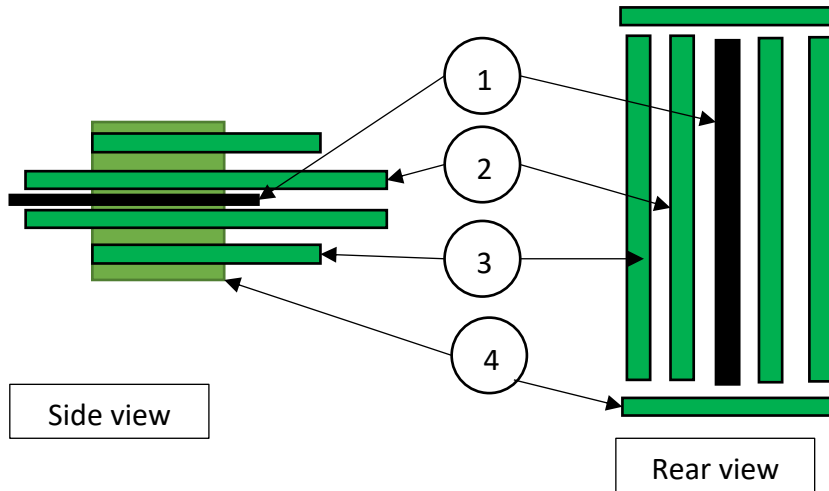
PCB stacking: Flex support (1), two large PCBs (2), two small PCBs (3), two smaller versions of the large PCB (4)
